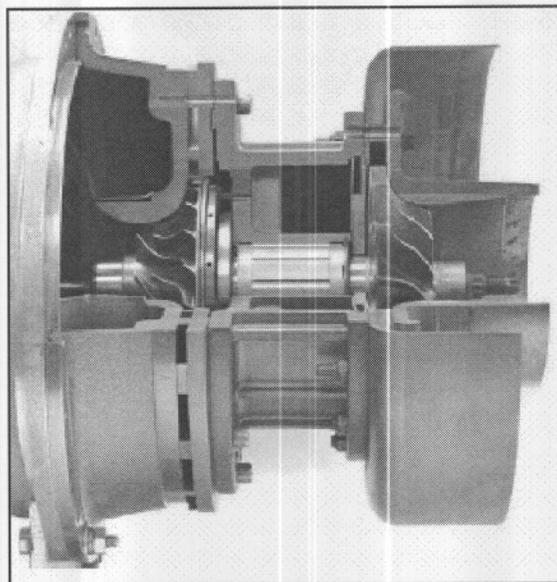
Sectioned view of the 30kW Capstone micro turbine's foil bearing.
